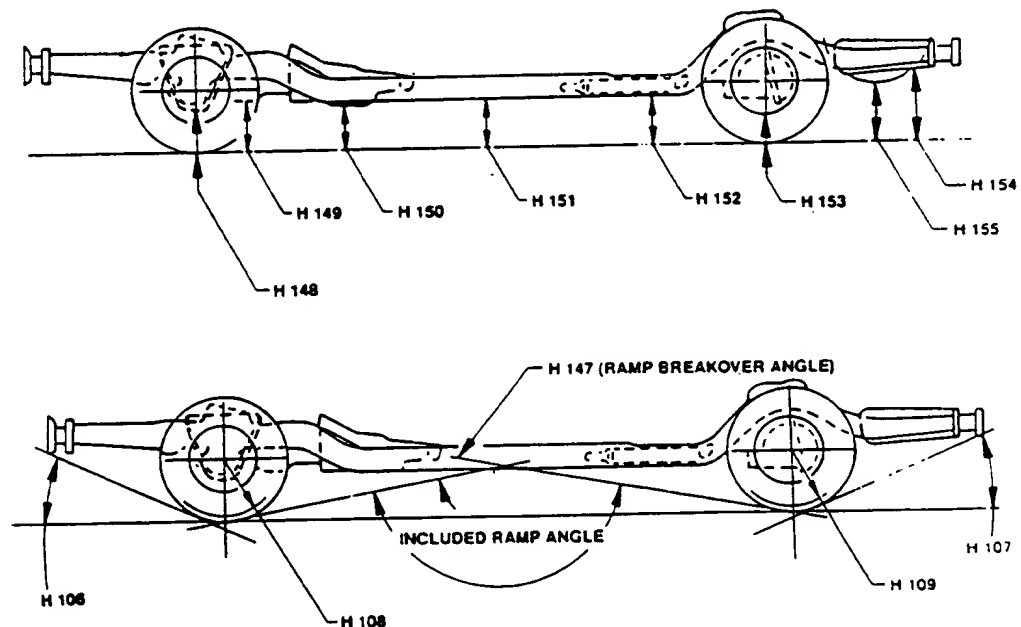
GROUND CLEARANCE DIMENSIONS
